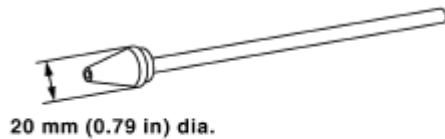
Identifying Compression Tester With Adapter Onto Spark Plug Hole
